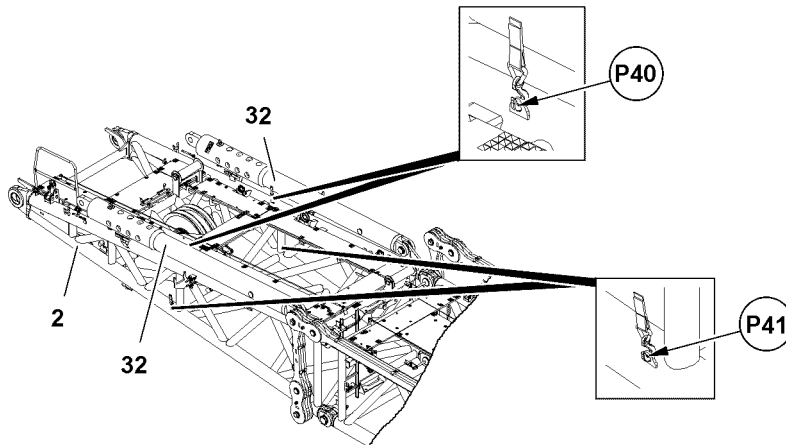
Assembling WA-frame 2 on the end section — Preparing WA-frame 2
